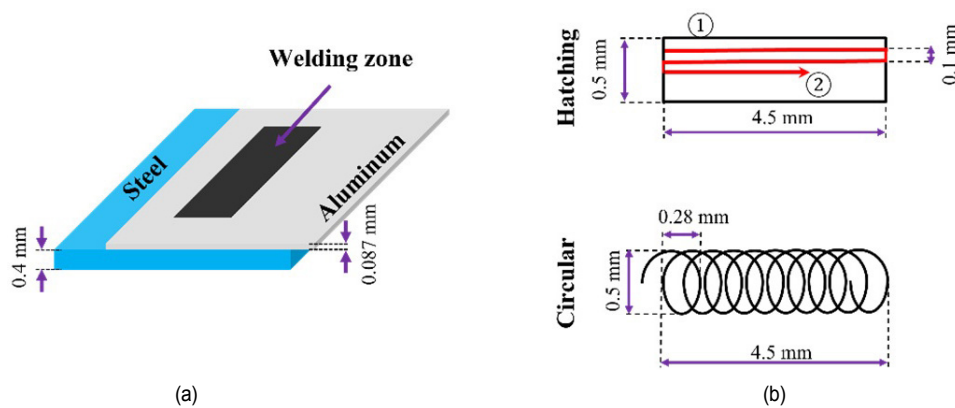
Welding path: (a) hatching path; (b) circular path.
